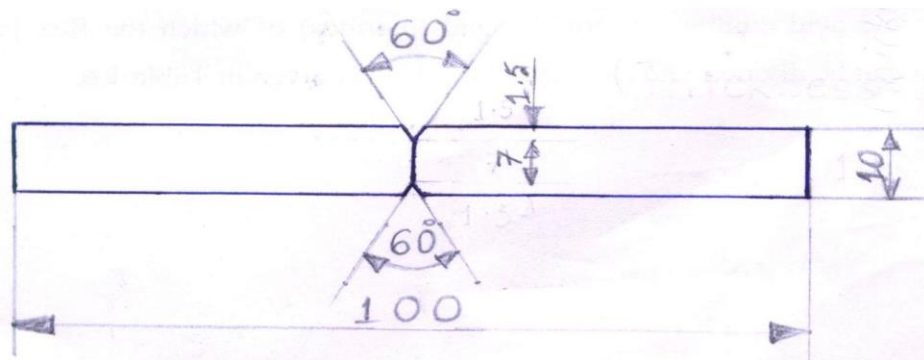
(b) Dimensions of the notched specimen prepared for tensile test
